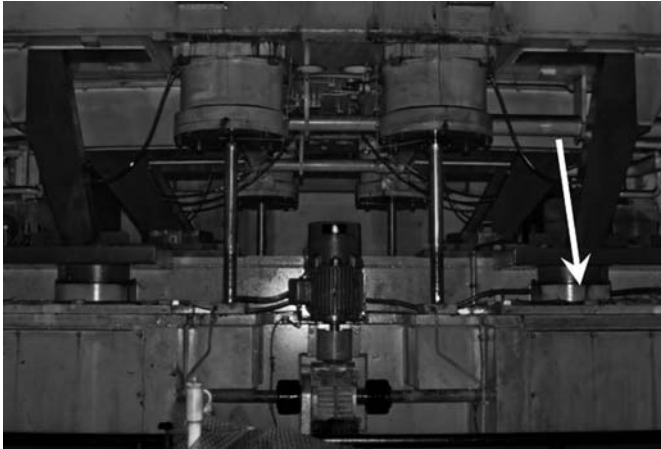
The visible parts of sheet stamping press linkage. The couplers are darkened while editing. The drawing slider is marked with white arrow
